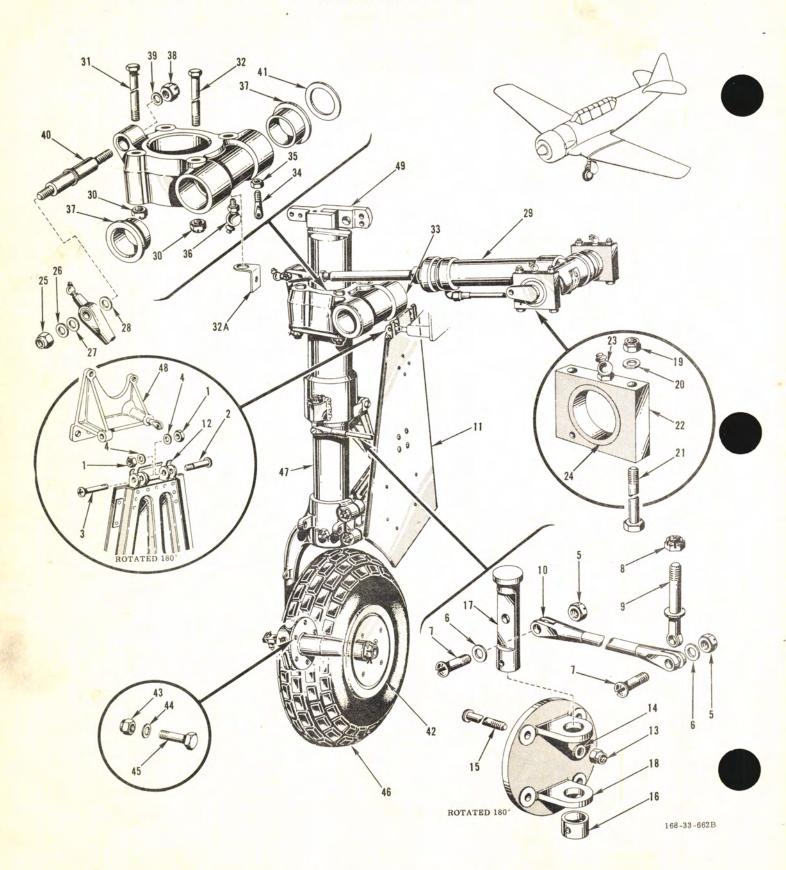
MAIN LANDING GEAR FAIRING AND CHASSIS EQUIPMENT
